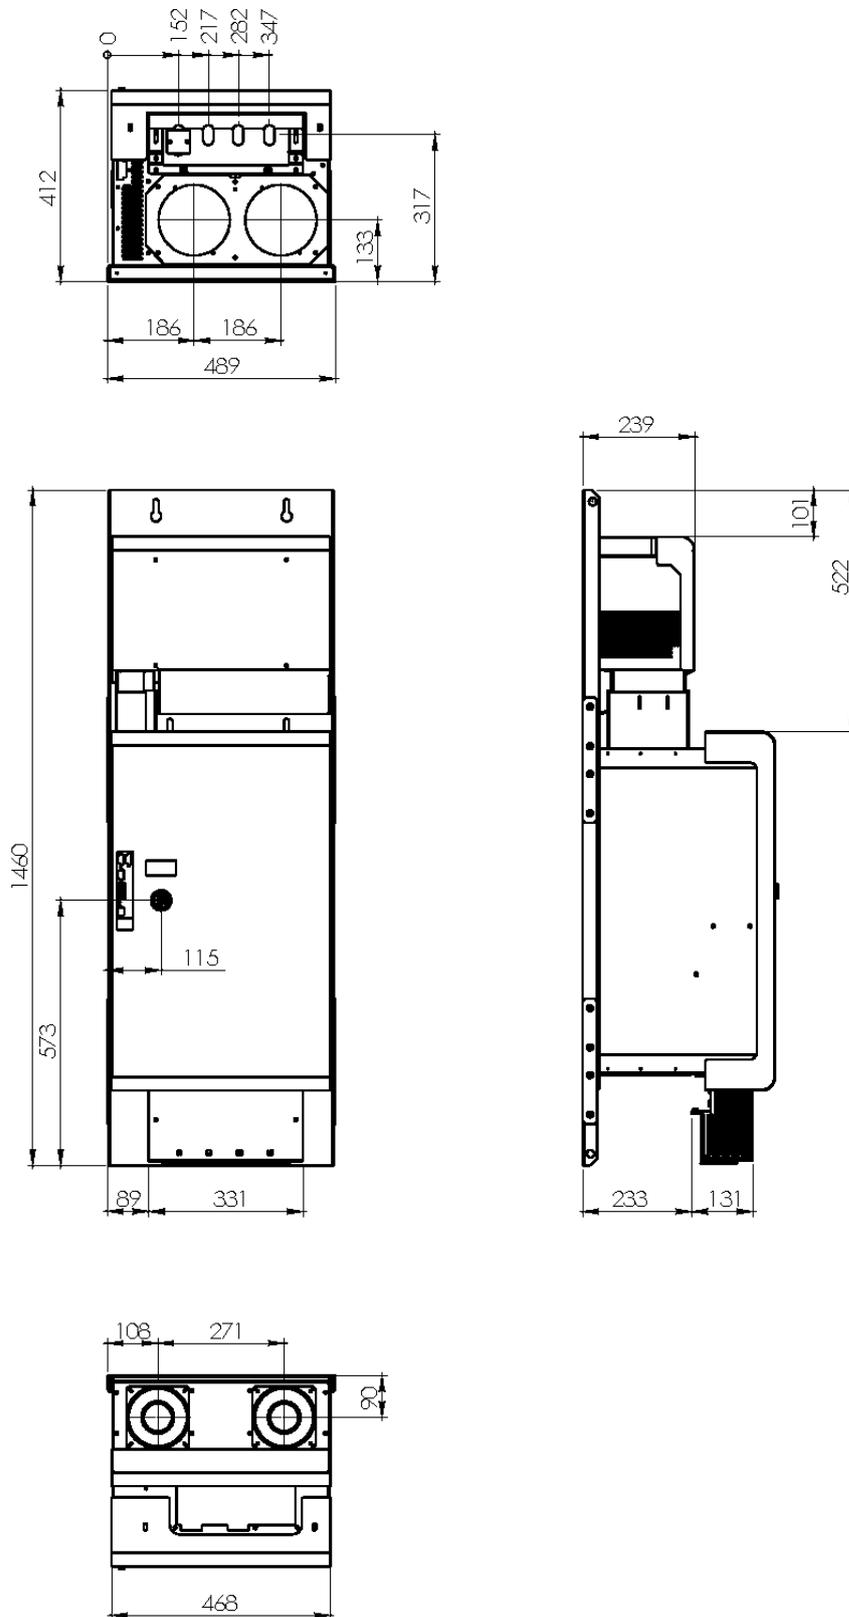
Dimensional drawings ECO<sup>sine</sup>® active FN3430-100/120-400-4
